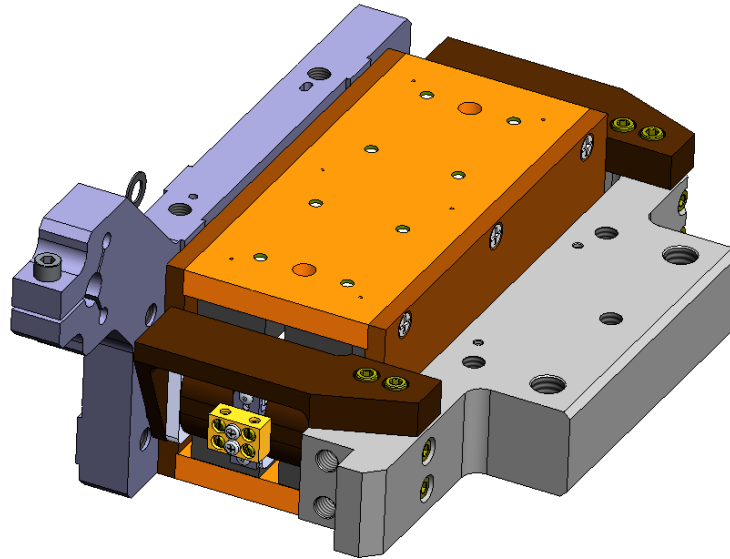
D0901102 Stage 0-1 Horizontal Actuator Assembly ready for install (Tooling Bar hidden)
